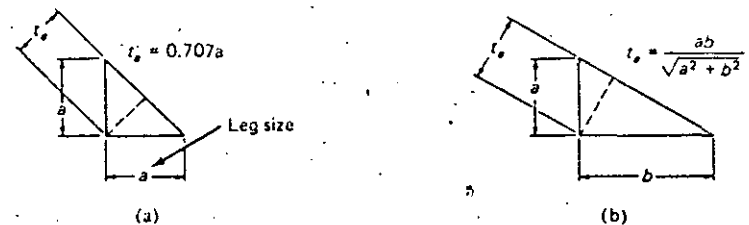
Effective throat dimensions for fillet welds (except by submerged-arc process).
